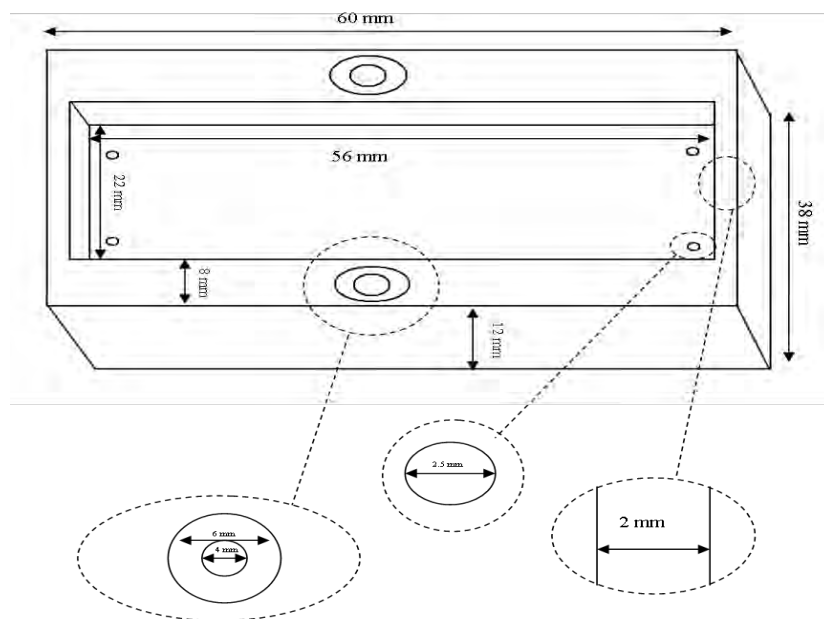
6 A schematic diagram of the specimen holder and its dimensions
